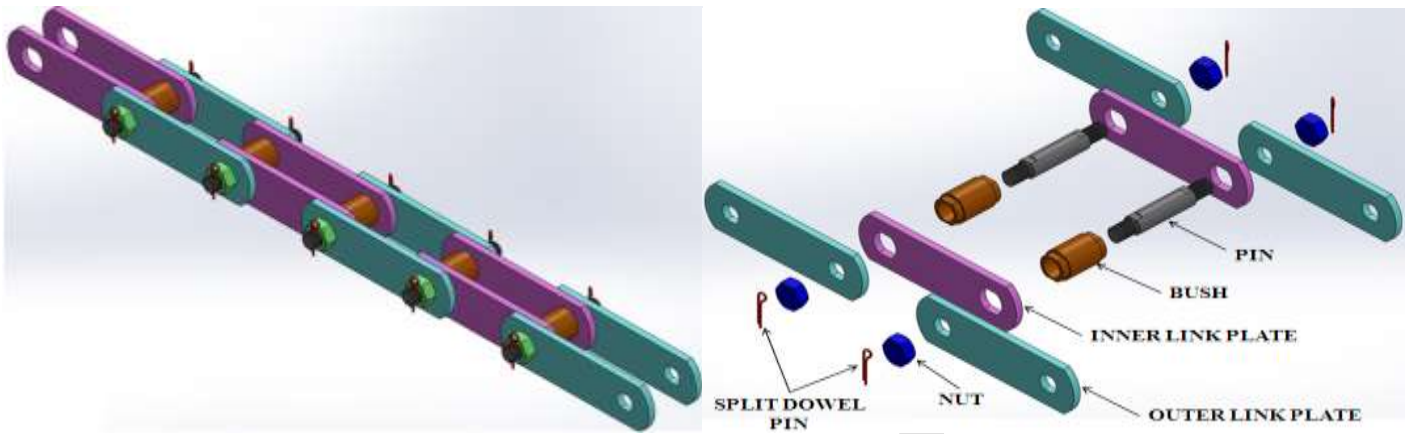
Assembly and Disassembly of Drag Conveyor Chain Existing Design.
